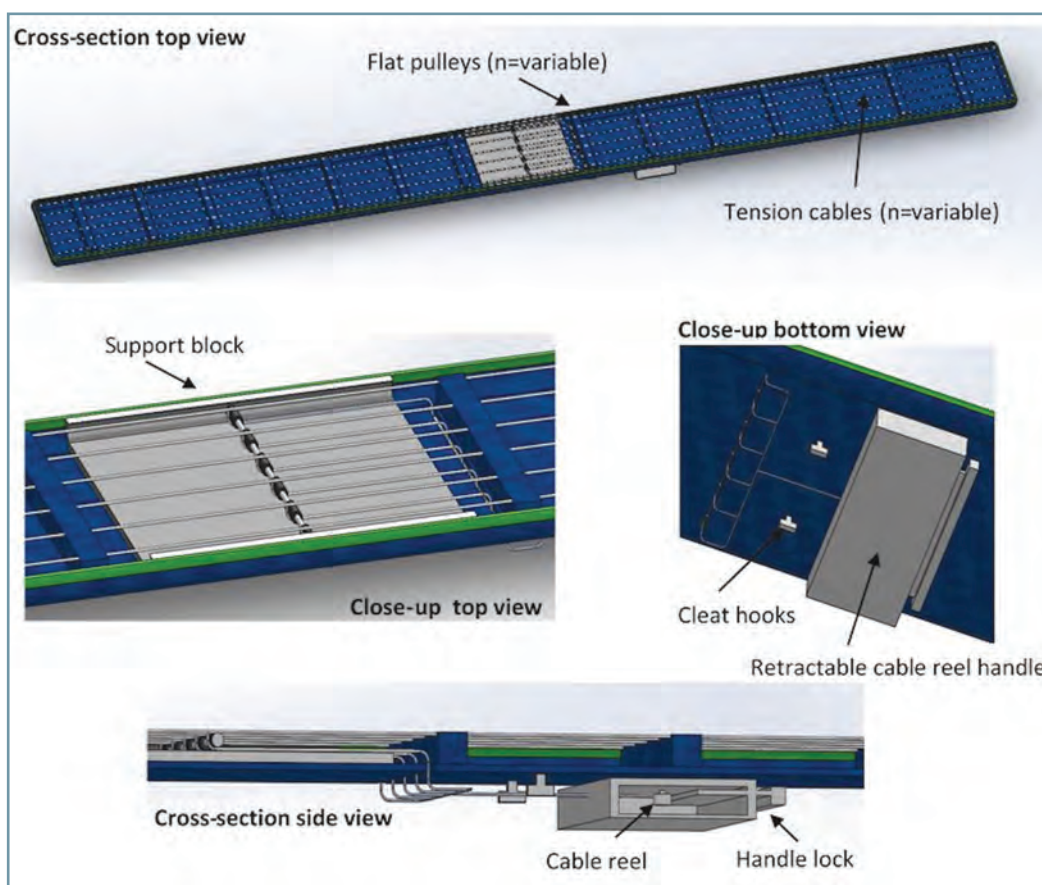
Graphical description of the device design using cross-sectional views to show interior details. The top-views show the flat pulleys, tension cables, and support block. The bottom view shows the cleat hooks and retractable cable reel handle. The side view shows a cross section of the cable handle detailing the handle lock mechanism.
